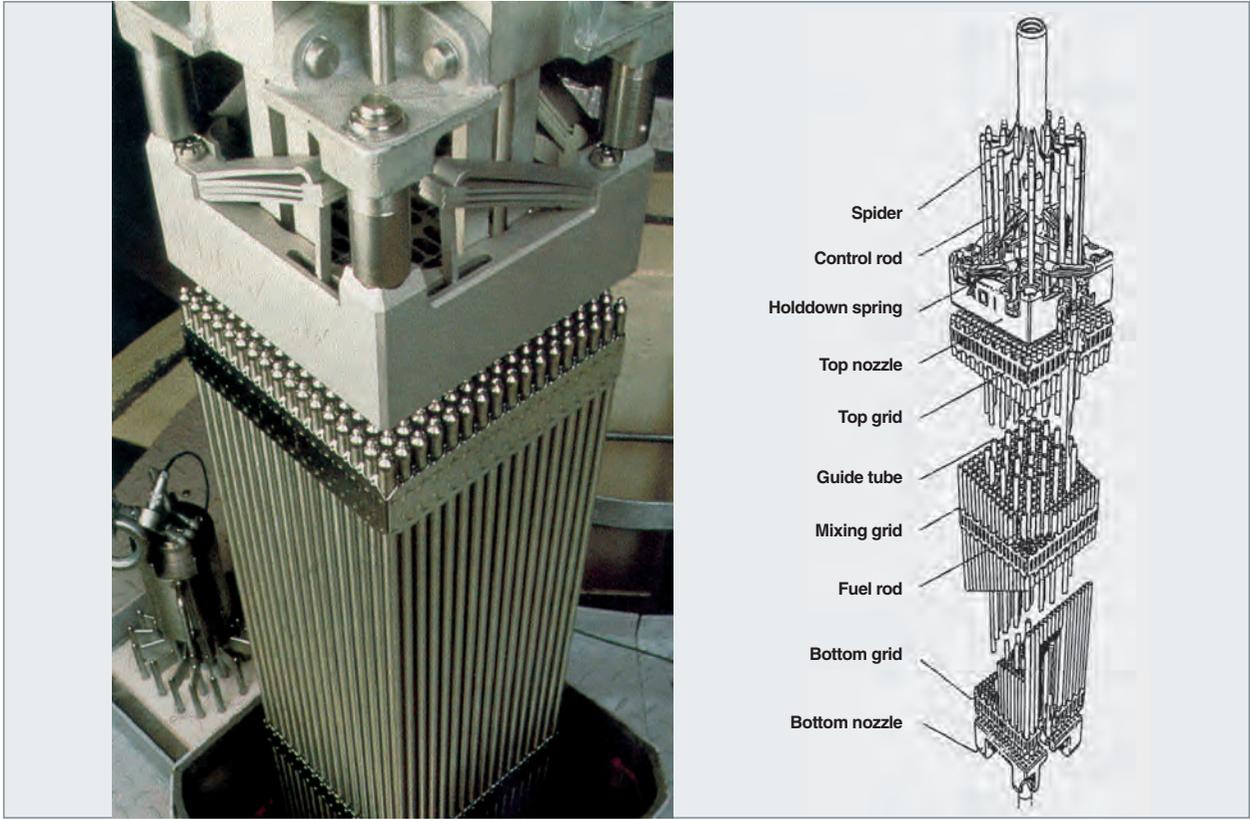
Schematic (and photograph) of a 17 × 17 fuel assembly and rod cluster control assembly.
